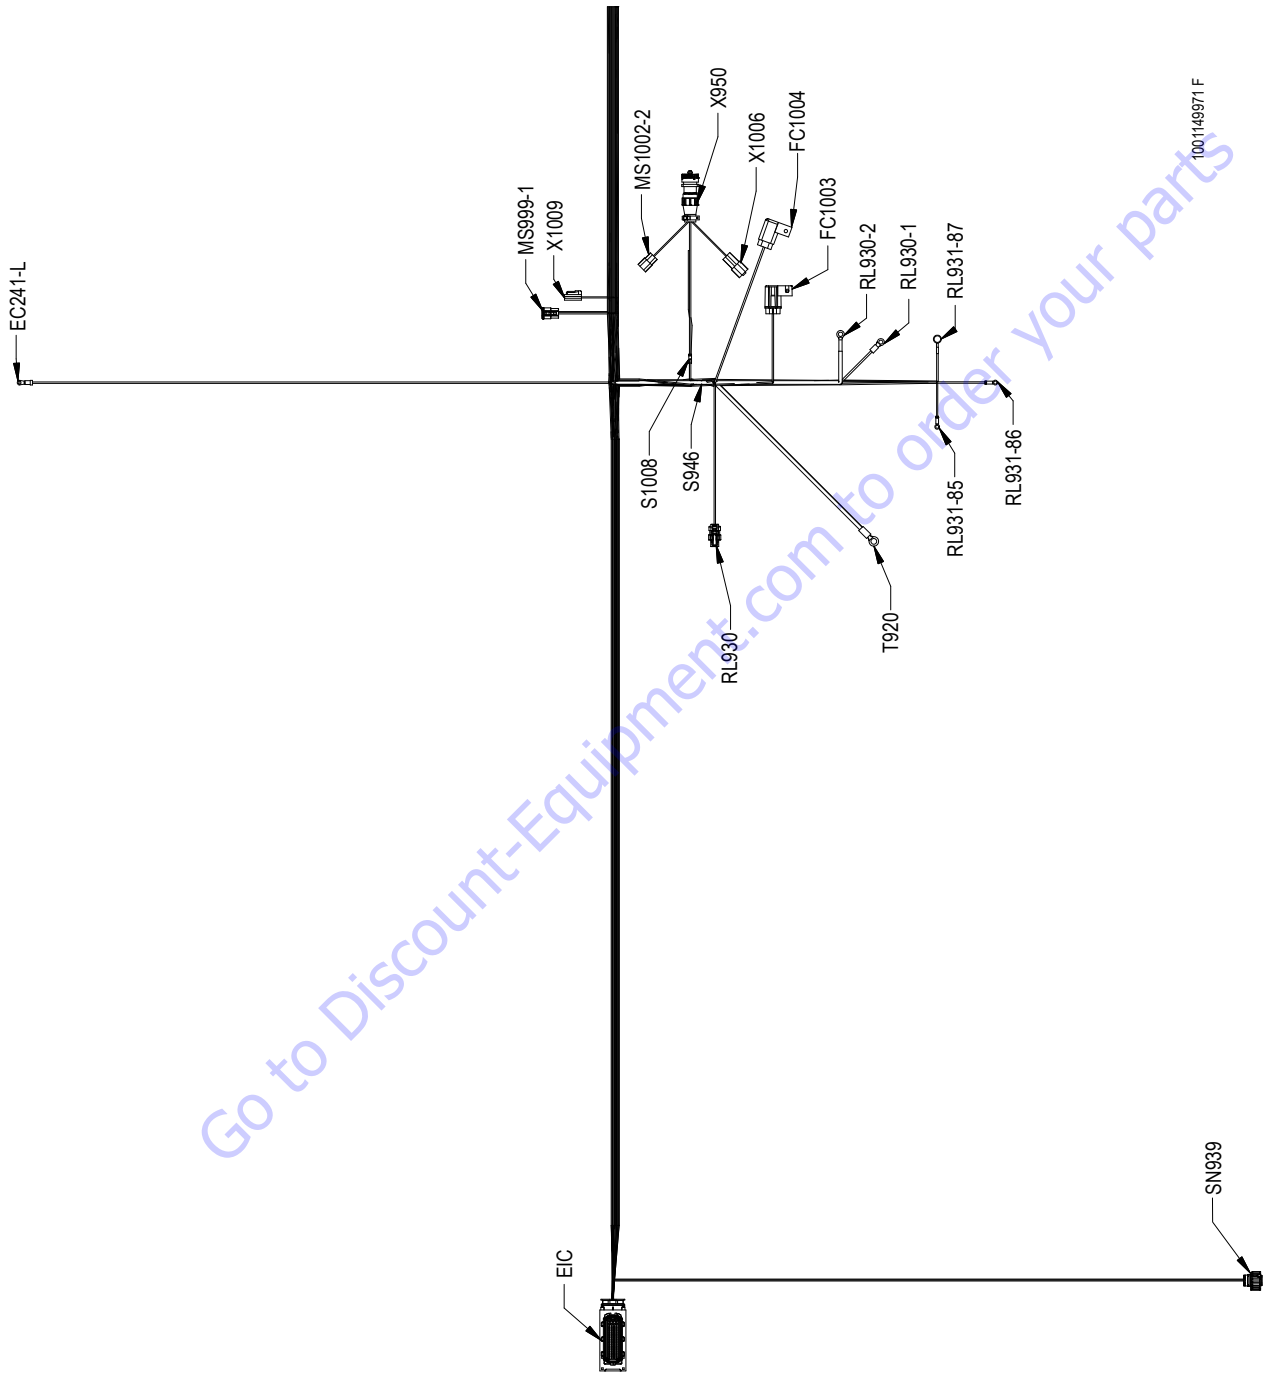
Engine T4I Harness - Sheet 2 of 9
